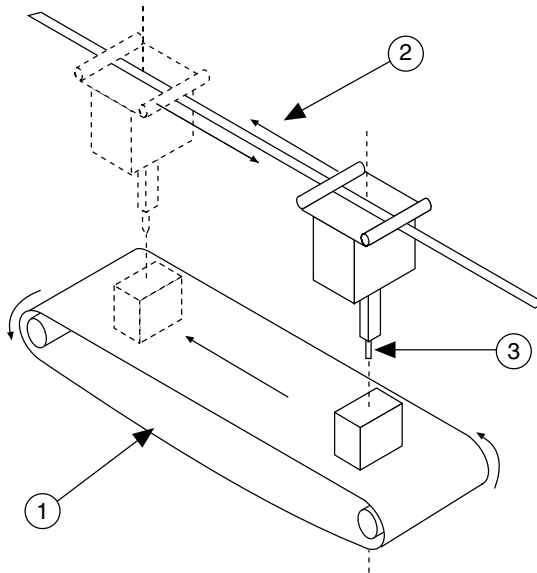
Welding application showing (1) conveyor belt, (2) movement of the welder as it follows the object and then returns to the initial position, and (3) welding point.
